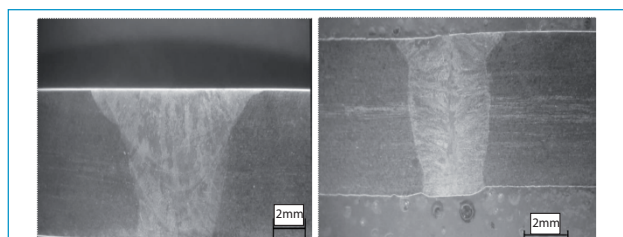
Cross sectional view of weld joints (i) TIG (ii) A-TIG
